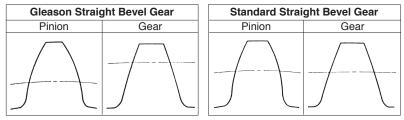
The Tooth Profile of Straight Bevel Gears
